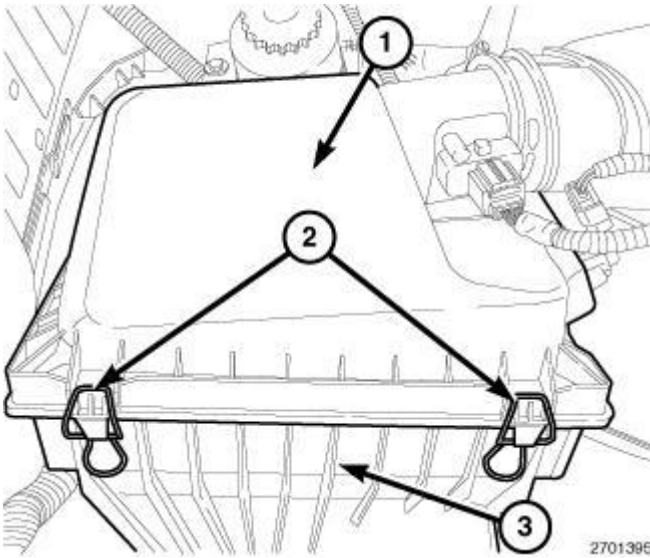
IDENTIFYING AIR CLEANER HOUSING & CLIPS
